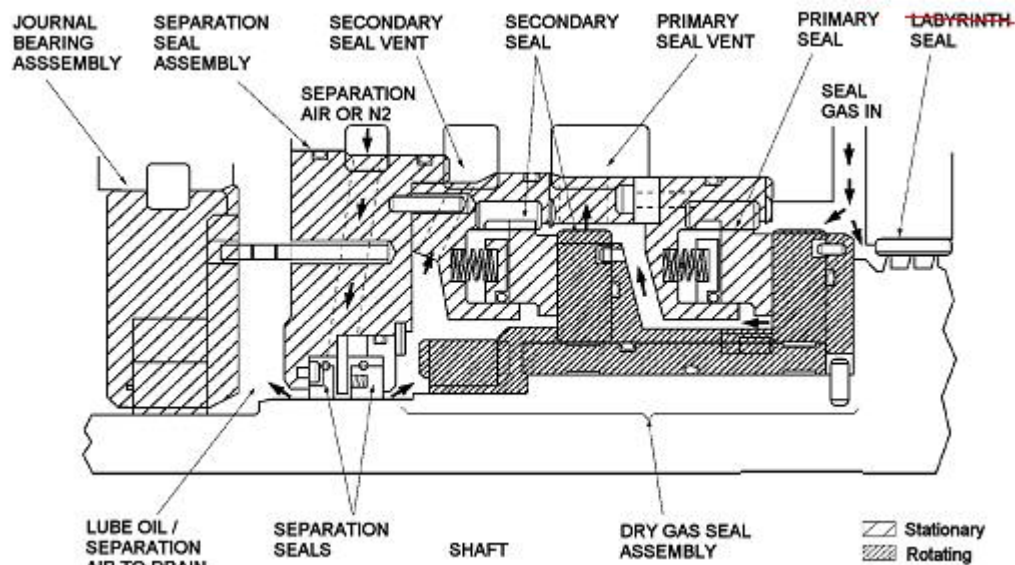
Tandem Seal Assembly Without Intermediate-Labyrinth Seal
